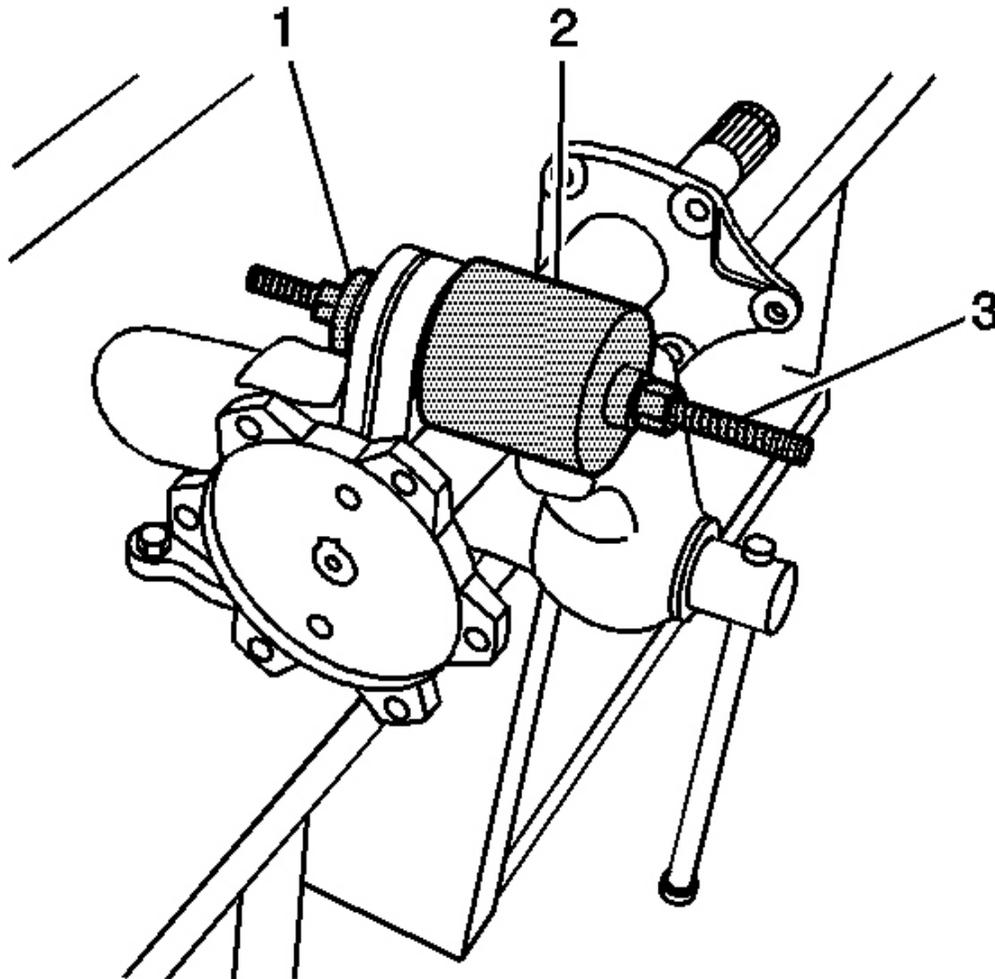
Installing J 45755-2, J 45755-1, Forcing Screw, Bearing & Washers Over Inner Shaft Housing Bushing
